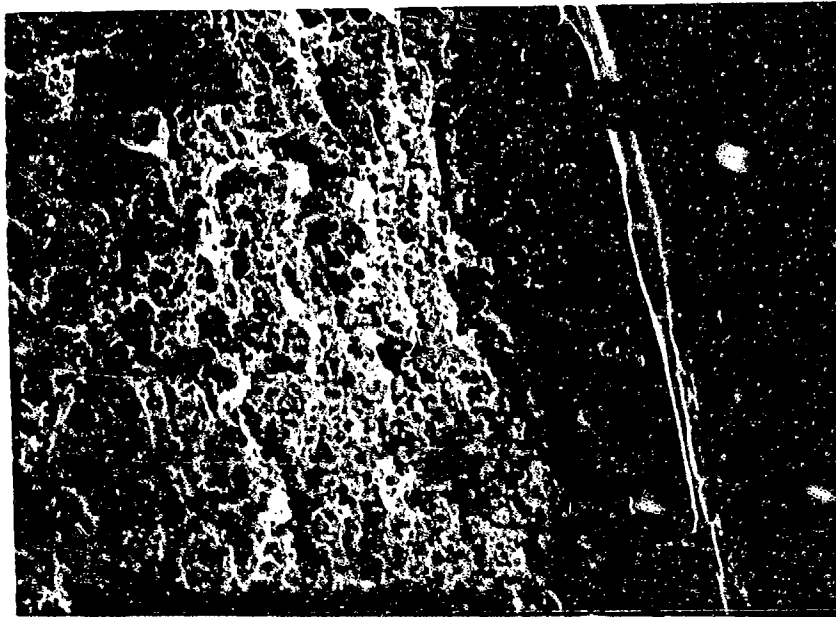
Equiaxed dimpled overstress in the primary fracture area.
